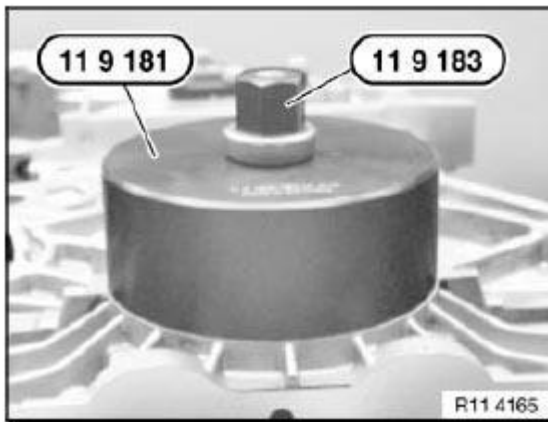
Special Tools (11 9 181) And (11 9 183)
